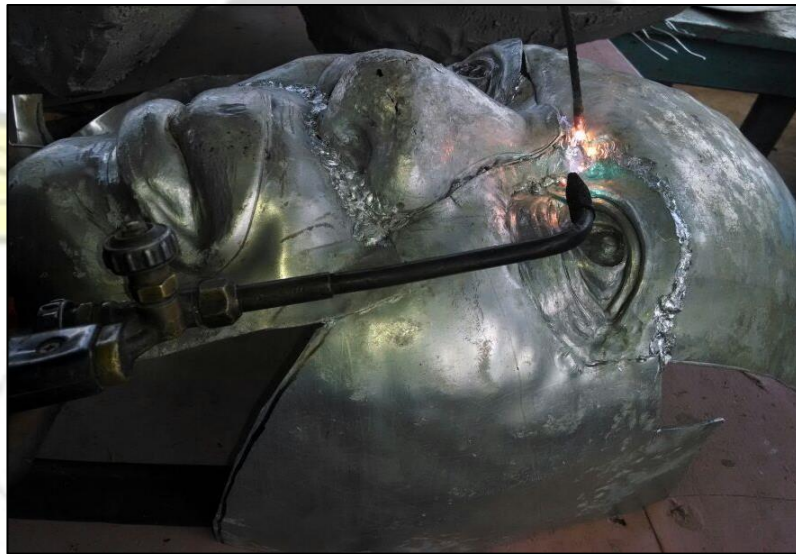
Reinforcing the welded joints of the eyes and forehead
